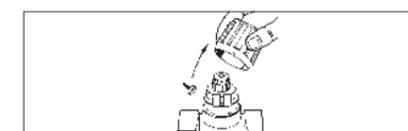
Unscrew the locking screw and remove the handwheel, taking care not to turn the control stem, and taking note of the corresponding setpoint for subsequent refitting.
